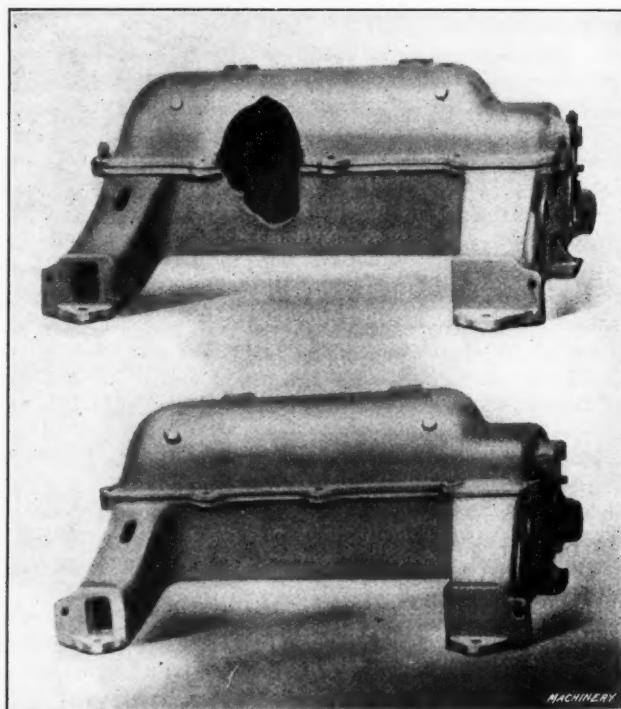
Fractured Aluminum Gear Case before and after being welded with Oxy-acetylene Blowpipe
